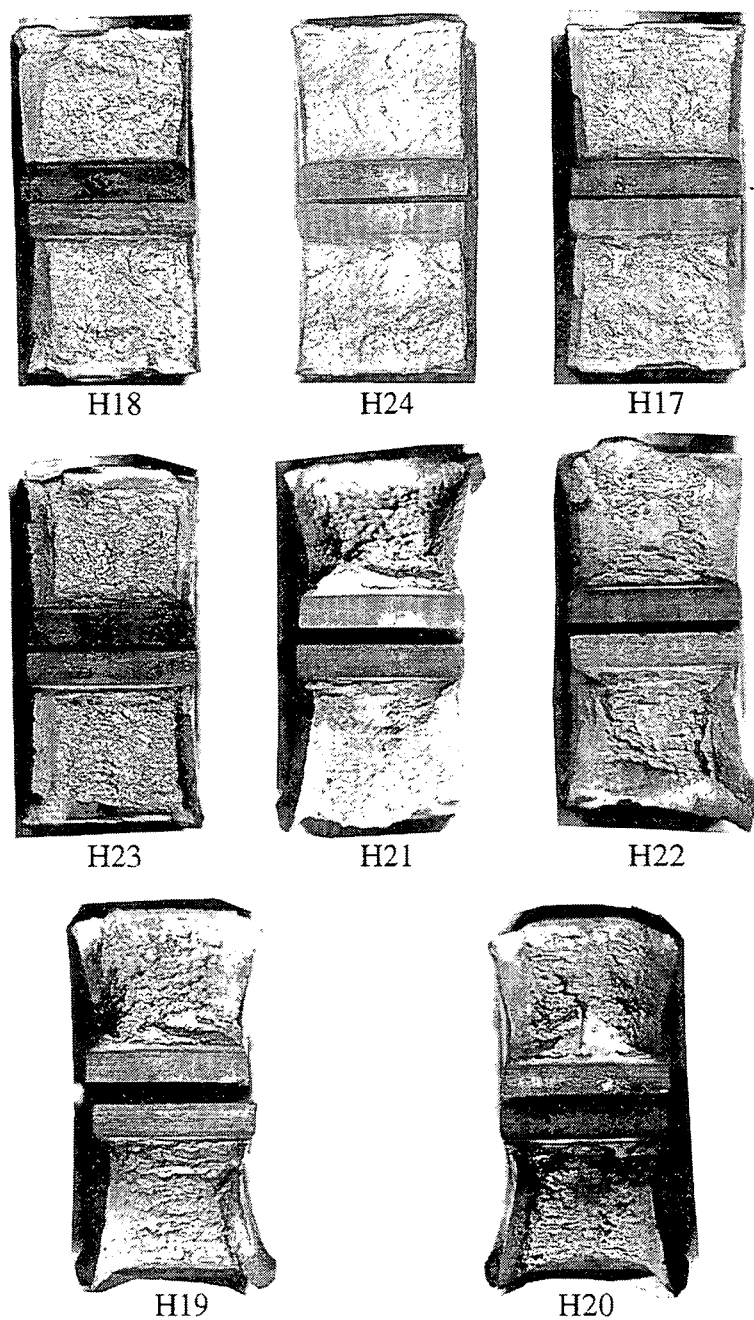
Charpy Impact Specimen Fracture Surfaces for Kewaunee Reactor Vessel Heat-Affected-Zone Metal
